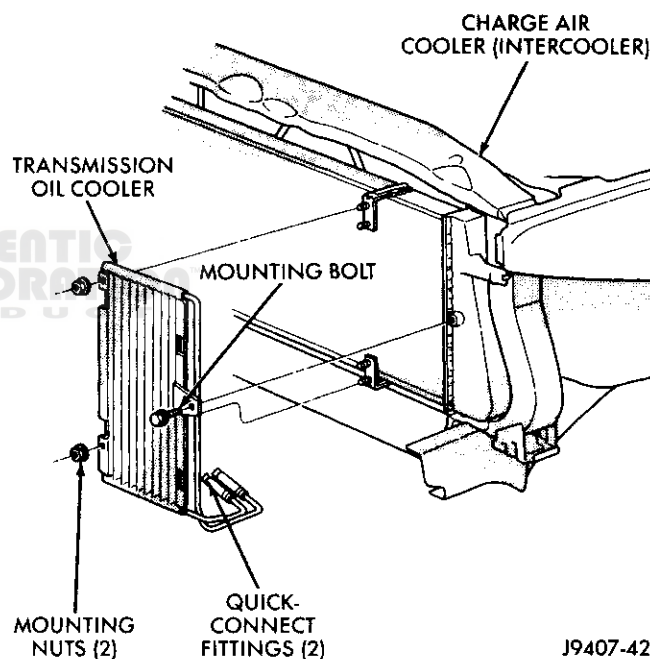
Air-To-Oil Cooler—Diesel Engine
